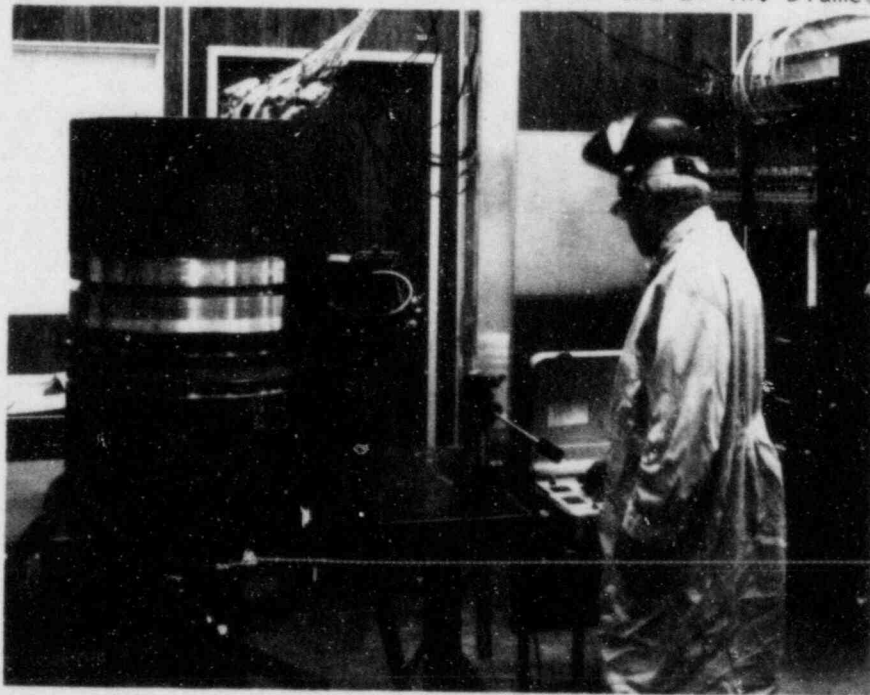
Orientation and Setup for Welding of 24-in.-Diameter Pipe
